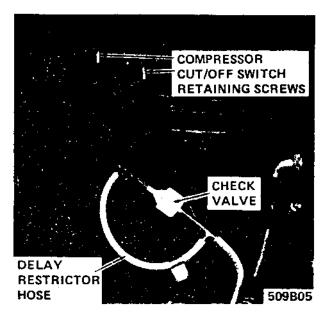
B-8 Compressor Cut/Off Switch Retaining Screws
